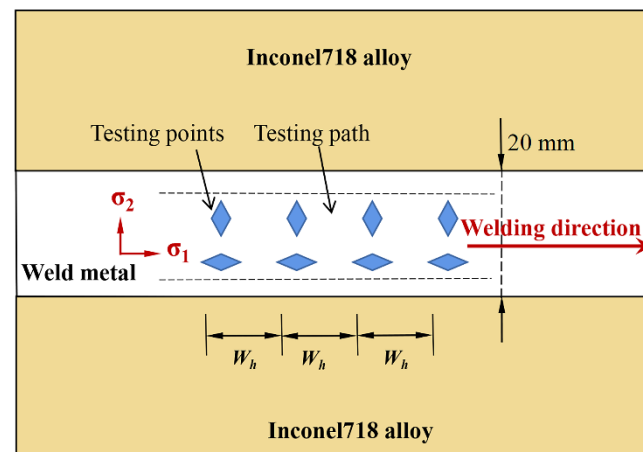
Inconel 718 weld zone residual stress measurement diagram.
